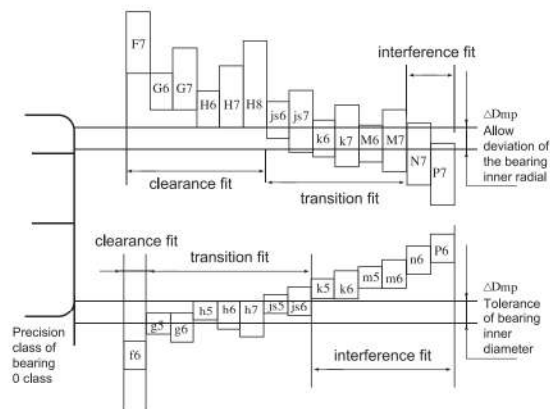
Shaft and shell fit relation of size tolerances (Class P0 precision for bearing)
